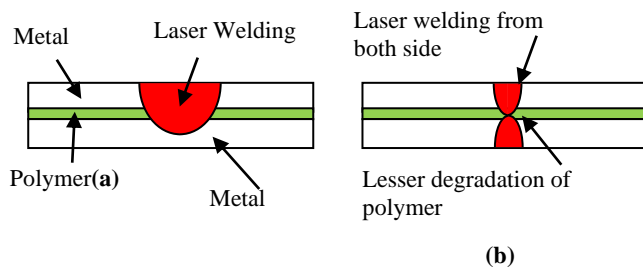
Laser welding of sandwich sheets: (a) single side approach, (b) double-side approach
